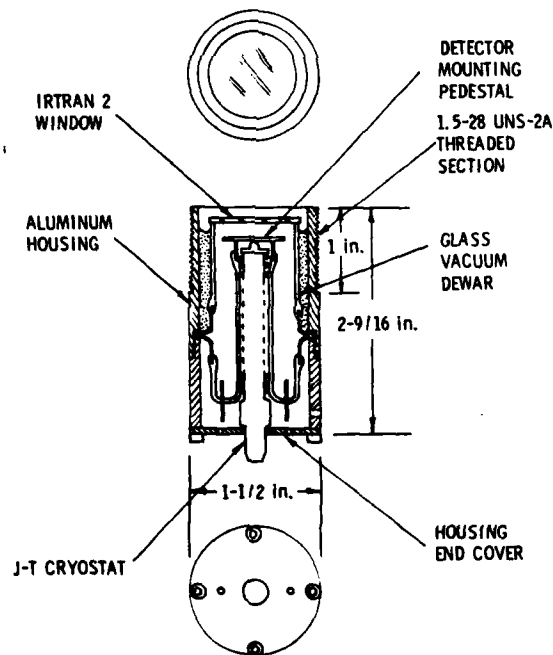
Dewar Package Assembly for Large Area PV HgCdTe Quadrant Arrays
